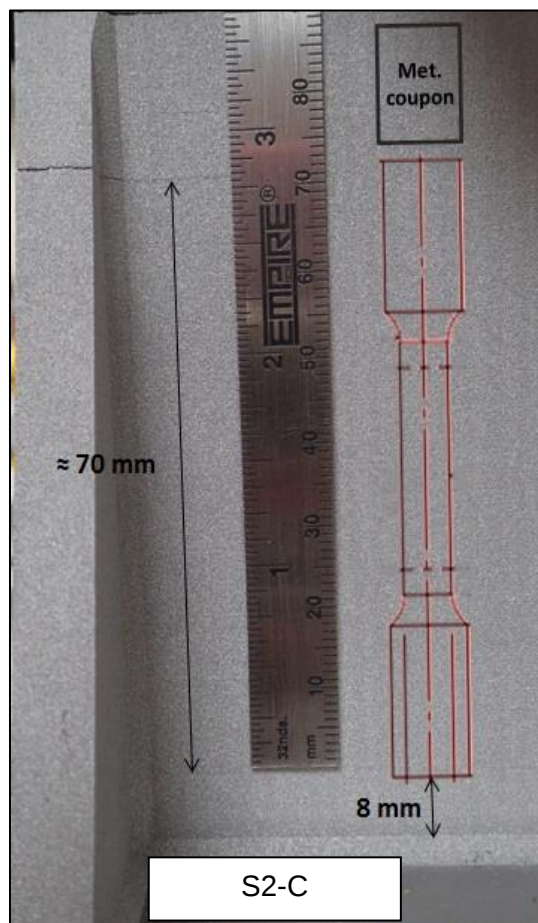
Layout for EDM Cut of Mechanical Testing Specimens, per ASTM E8-09, Specimen 33.2.2.1 Room Temperature Tensile Test
